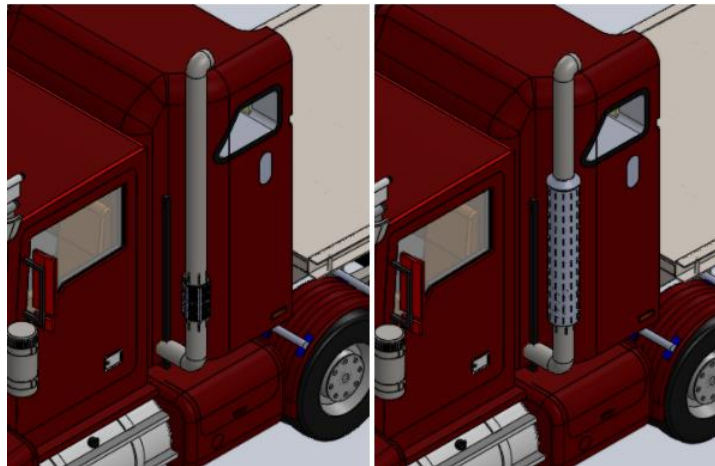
Thermoelectric Device Depicted on Semi-truck without Heat Shield (Left) and with Heat Shield and Rain Cap (Right)
